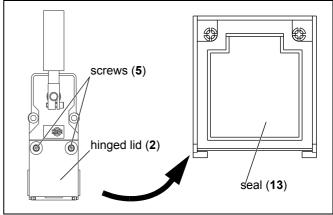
Misalignment switch: Replacing seal in the hinged cover
